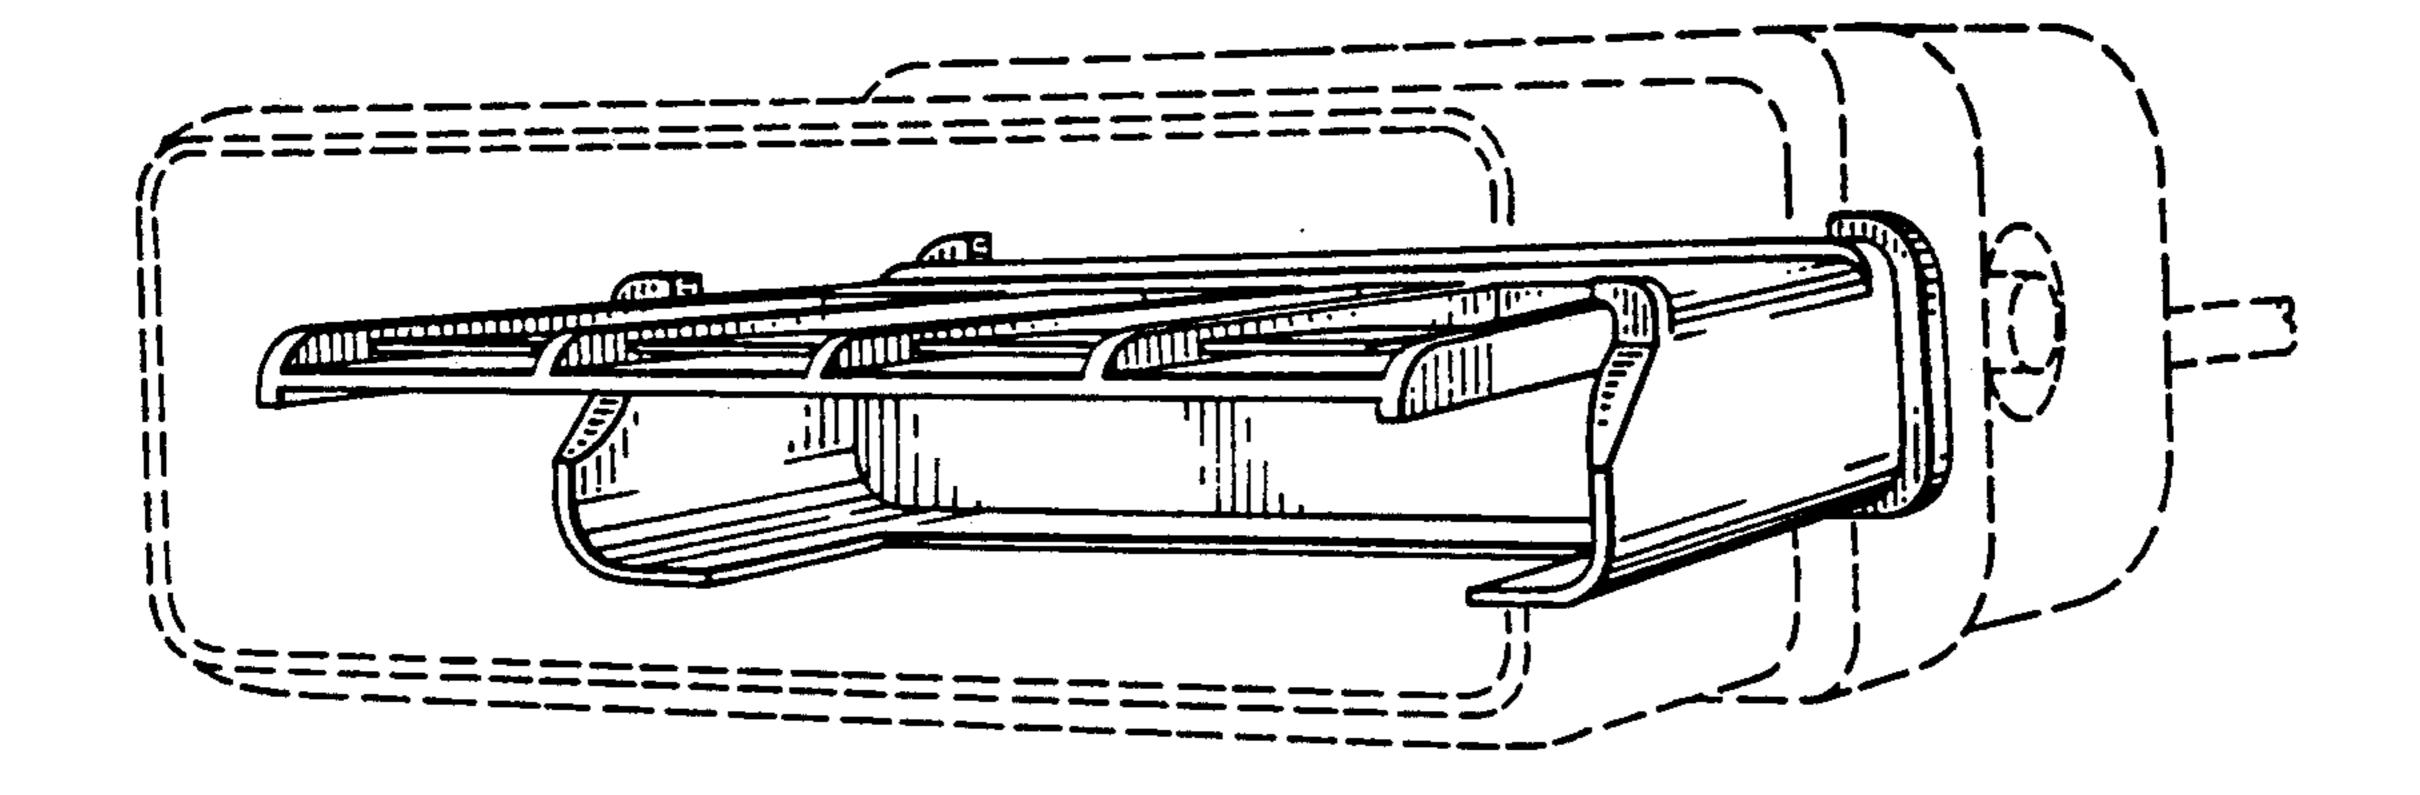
is a right side view of the inside connector for a communication headset system, the left side view being a mirror image;
